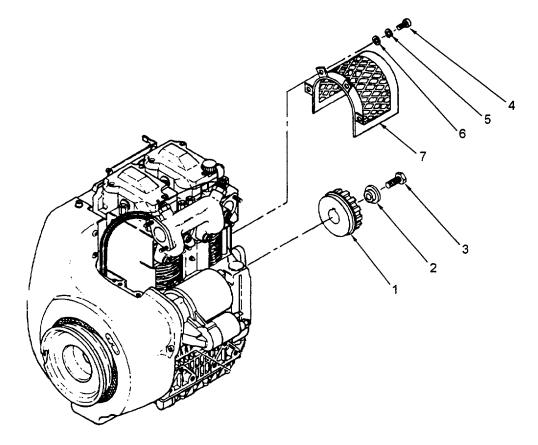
Engine Flexible Coupling Adapter and Guard Installation
